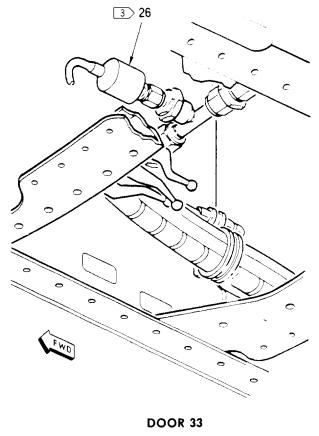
Refuel/Defuel System Component Locator (Sheet 7)
